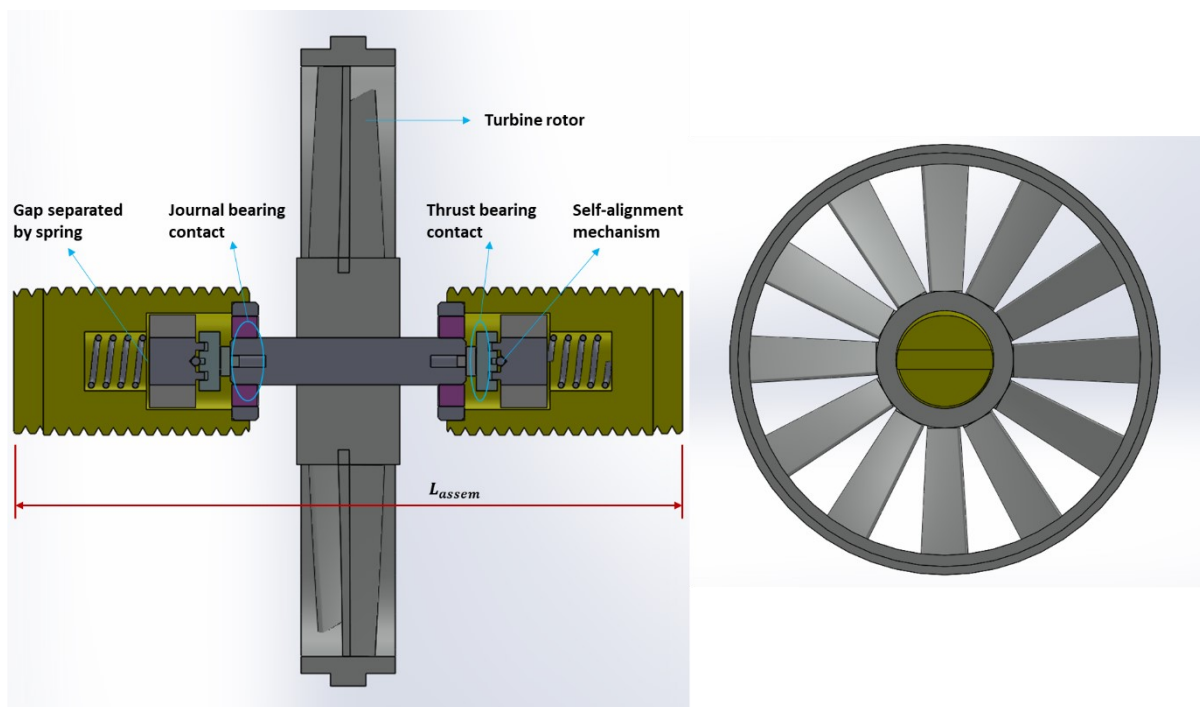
Assembly of the Micro Bearings and the Micro Turbine Rotor
